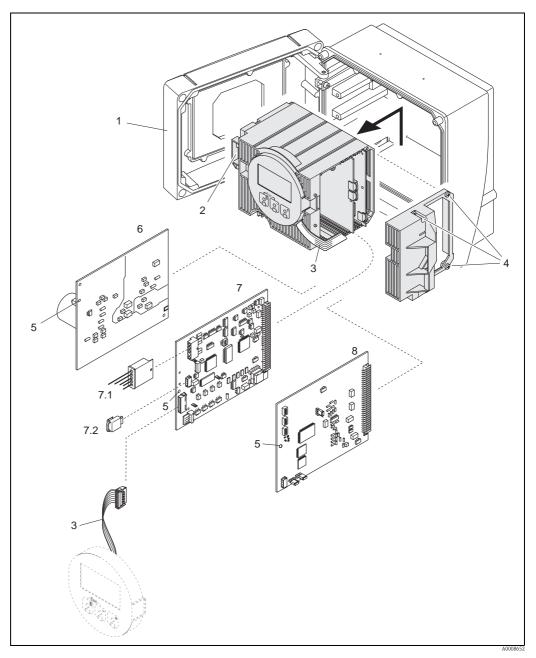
Wall-mount housing: removing and installing printed circuit boards
